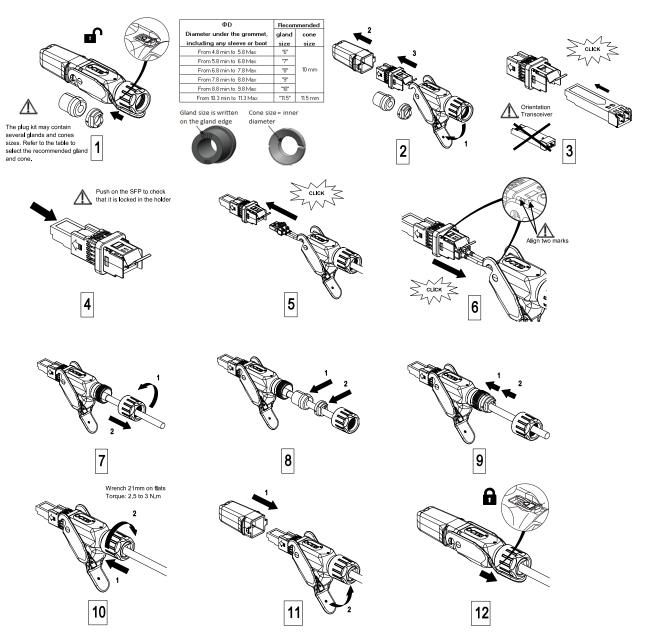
OCTIS SFP+ Reverse Lever Assembly Instructions (PN: 7770612)
